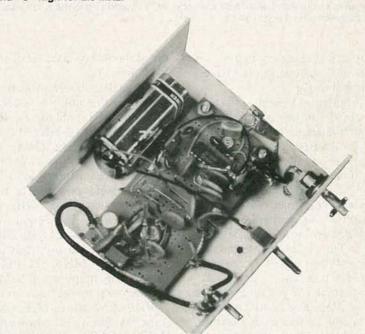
THE COMPONENTS CAN BE MOUNTED on perforated-wiring board. To help shield the components, a large braided grounding wire runs around the board.
